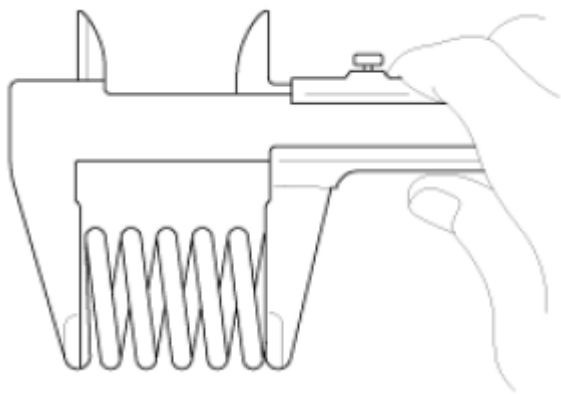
Measuring Free Length Of Valve Spring Using Vernier Calipers
